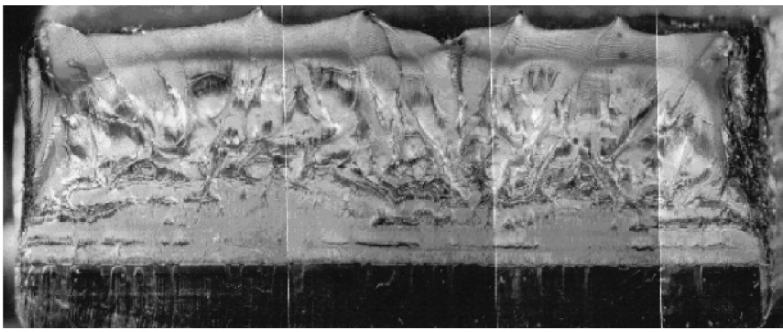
Fracture surface illustrating combined brittle and ductile failure under fatigue.
